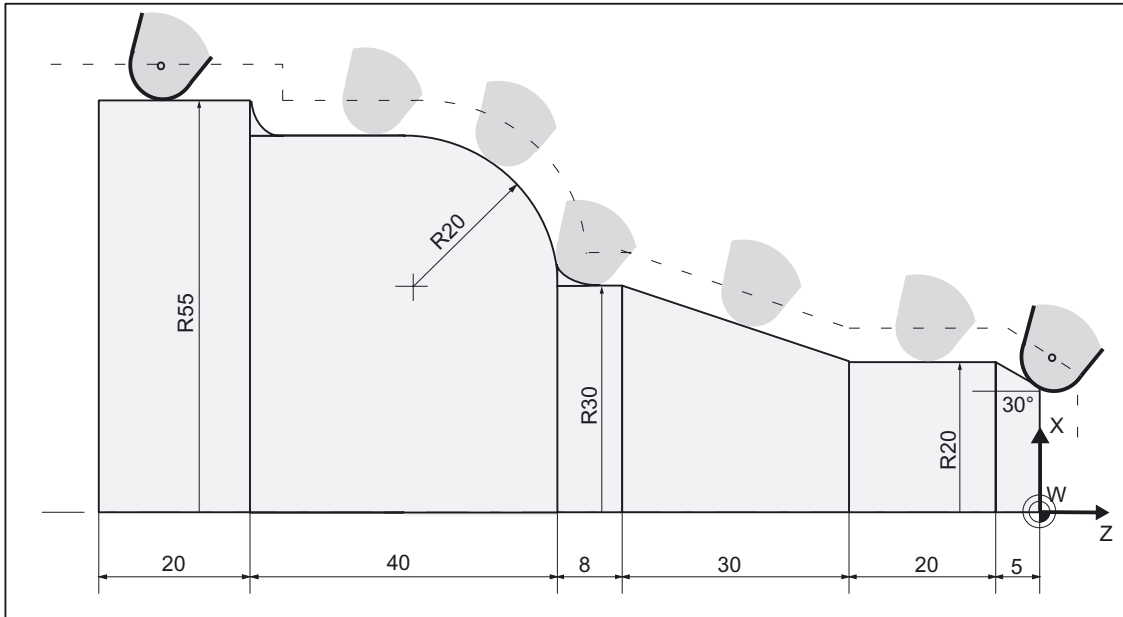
Example of tool radius compensation, cutting edge radius shown magnified
